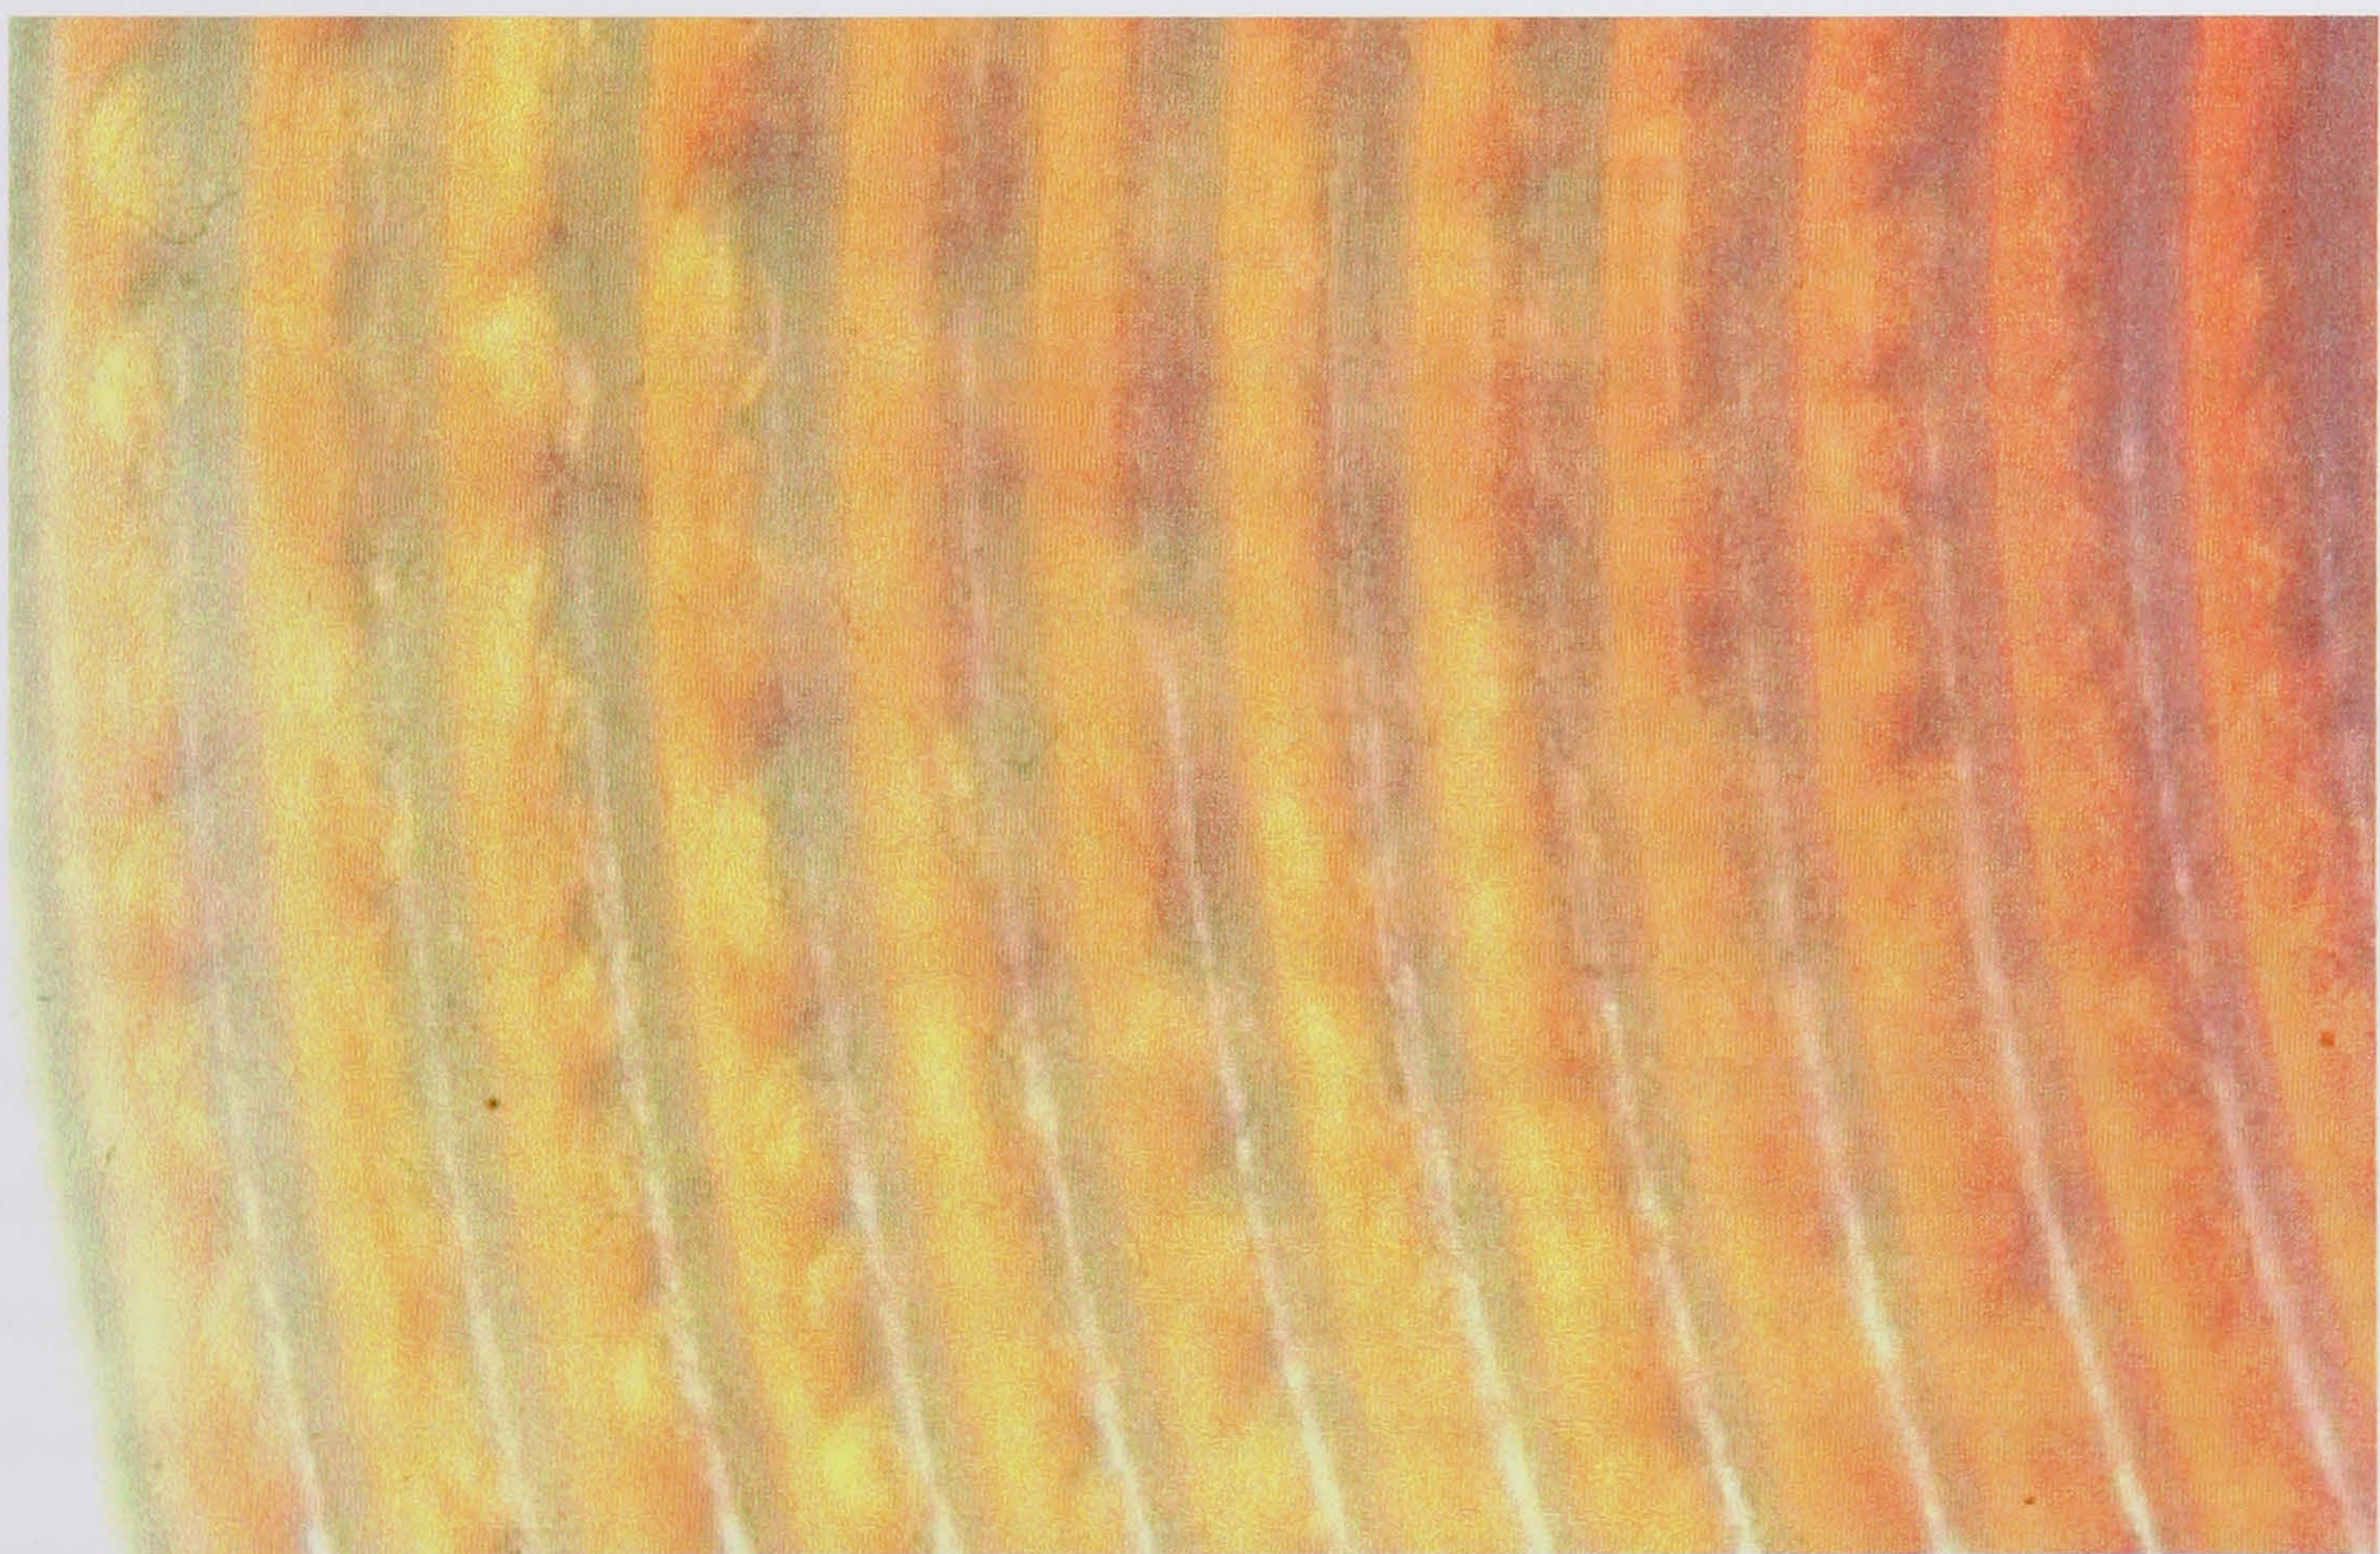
shows full wave mixing at position 4 [Sutherland 1999]
